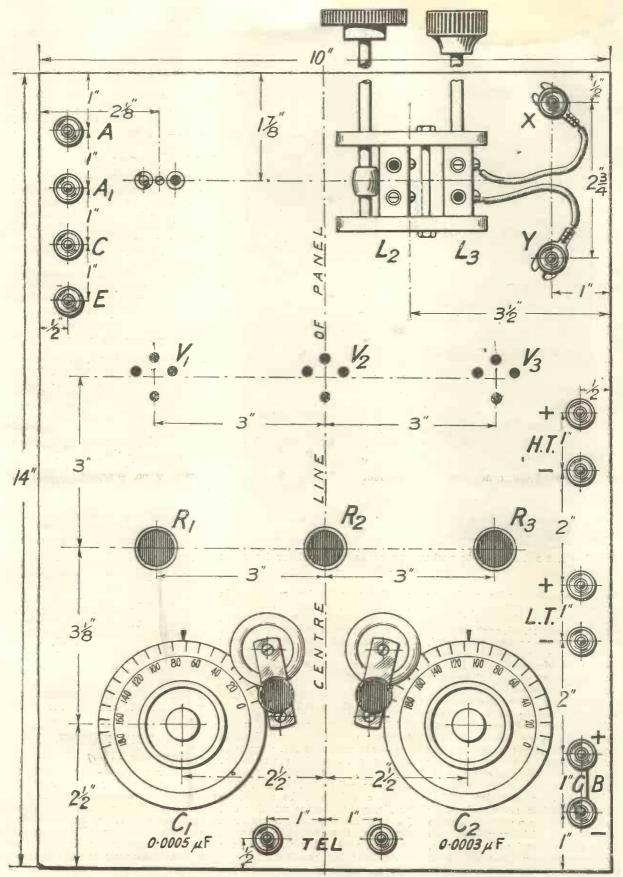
Drilling diagram showing front of panel. Blue Print 66A.
